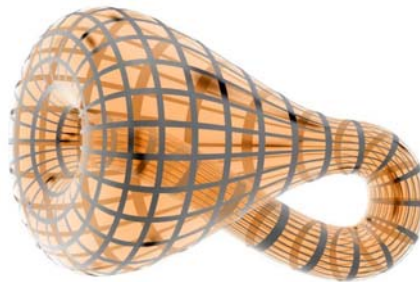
RM processes can fabricate complex shaped parts that are difficult to model using existing CAD tools
